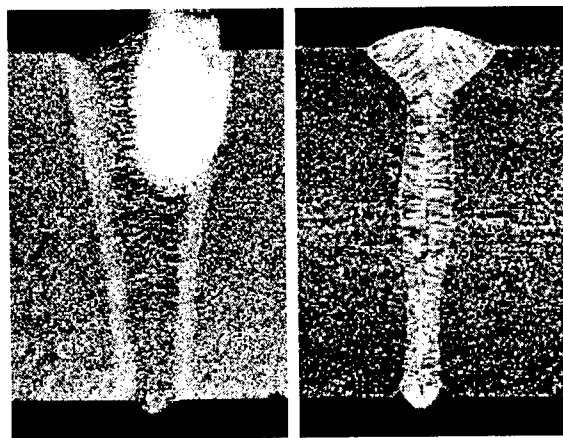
Cross sections of bead-on-plate welding seams in 10 mm plates; laser power 12 kW
